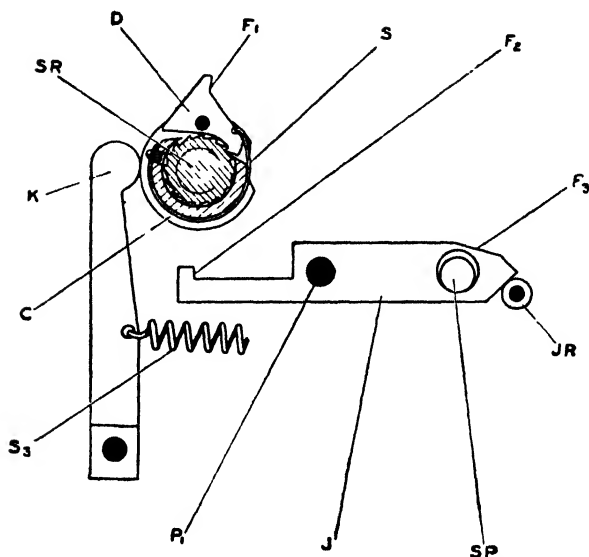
THE TAPE CONTROL UNIT CLUTCH MECHANISM.
